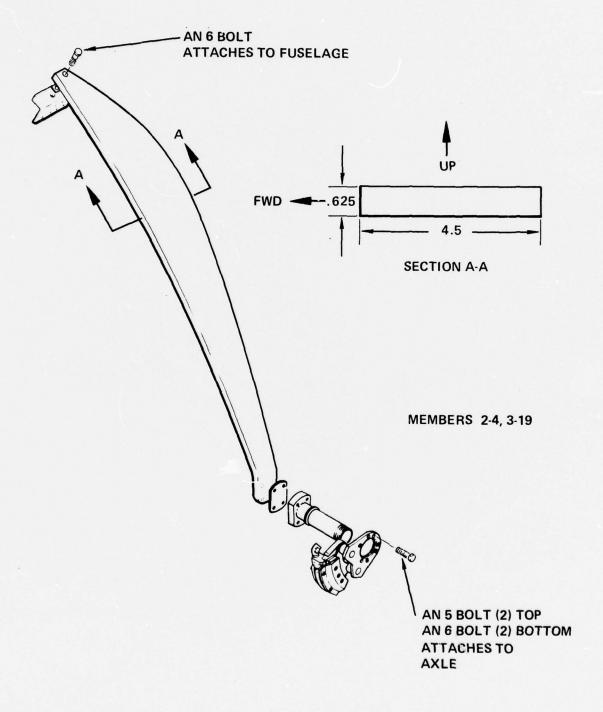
Main Landing Gear Cantilever Spring Cross-Section
